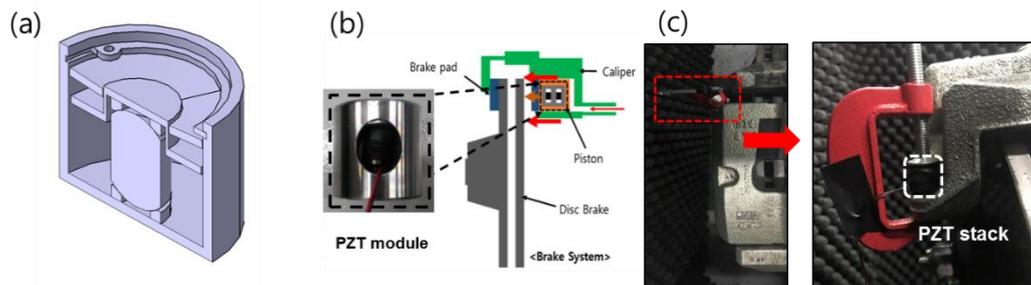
PZT stack module (a) module cross section (b) module inside caliper piston.
